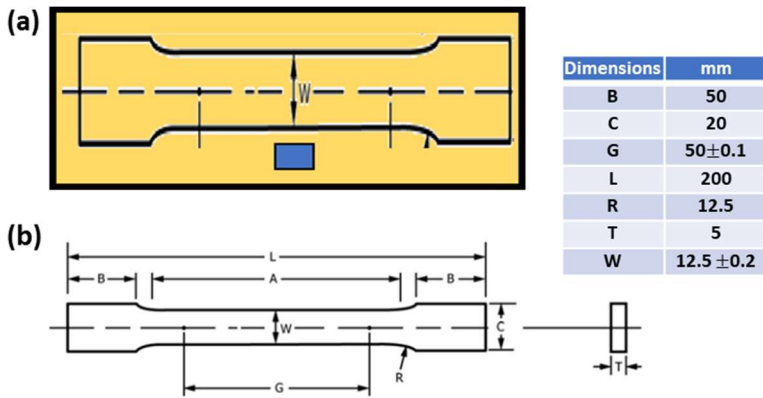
(a) Schematic drawing showing the tensile and hardness test samples; the tensile samples should be machined according to the dimensions provided in the table, while the hardness test samples should be 7mm (width) x 7mm (length) x 5mm (height).
